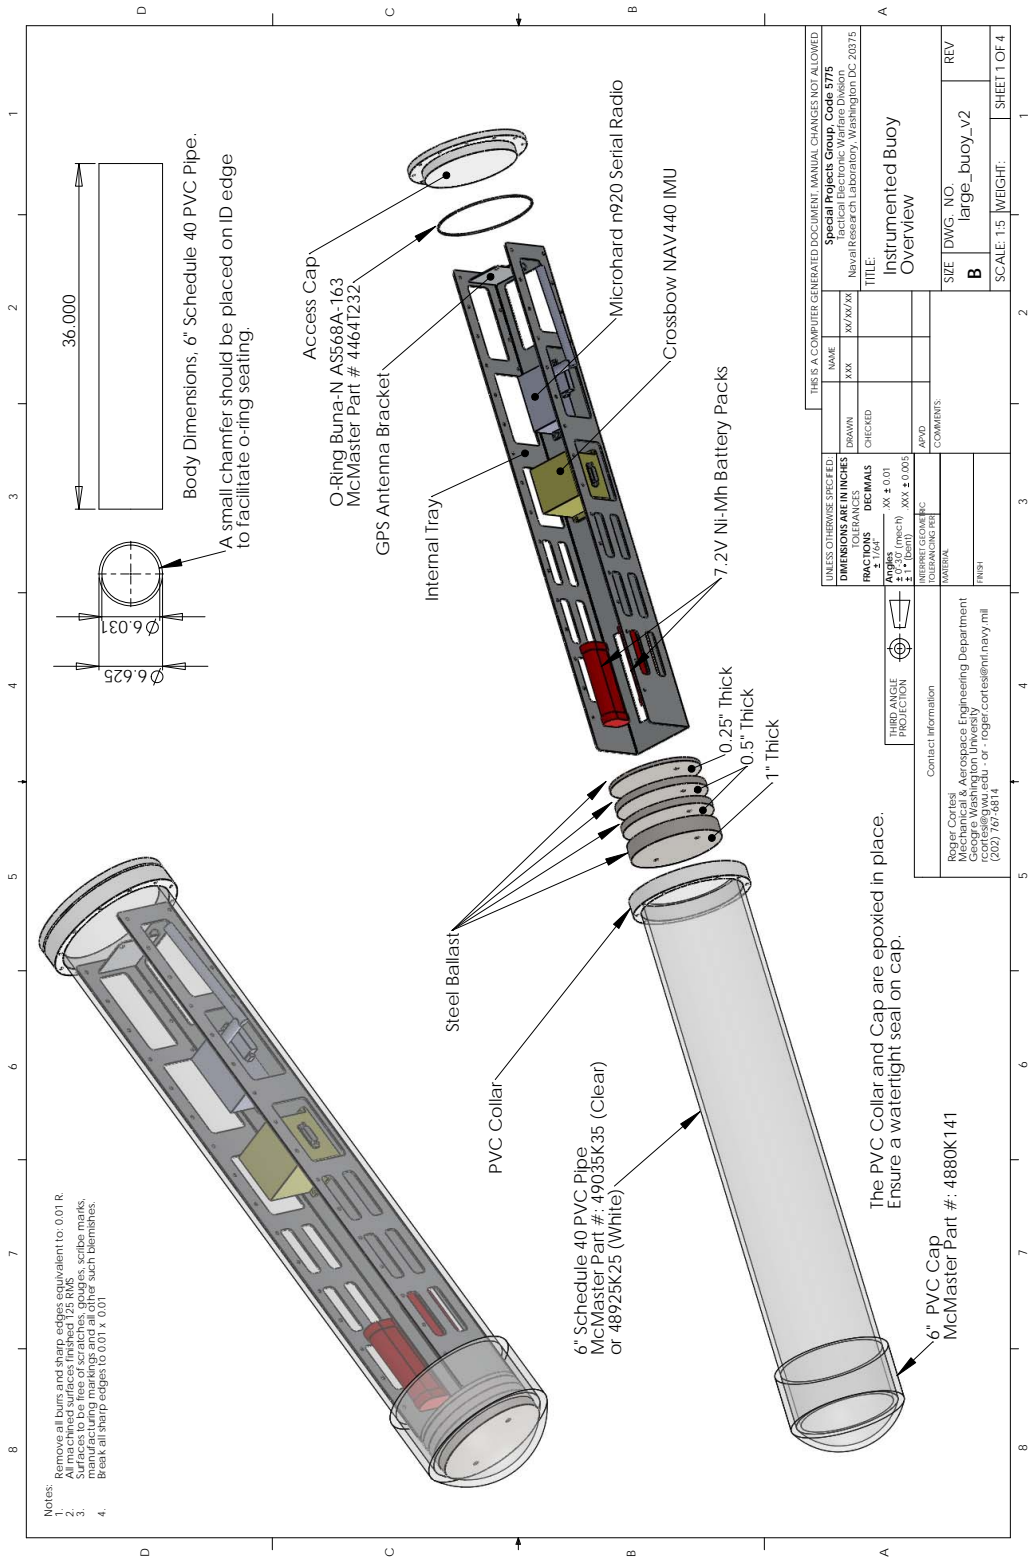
The assembly drawing of the large instrumented cylinder.
